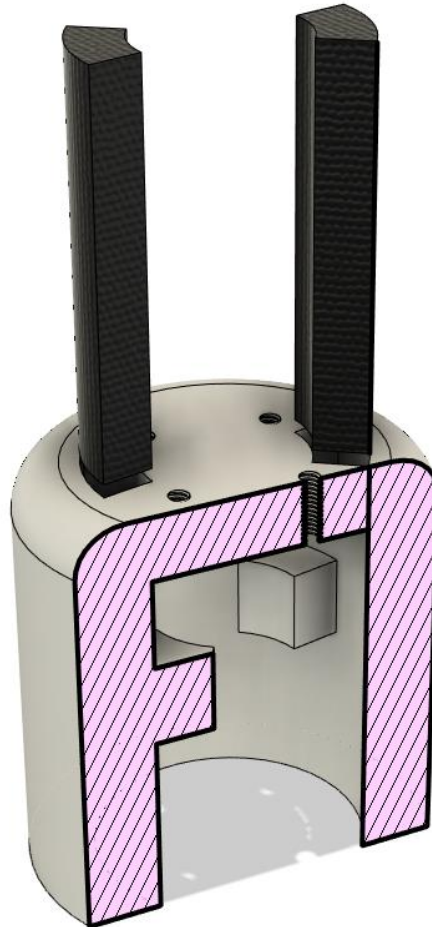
Cutaway View of the Ball Valve Adaptor and Pins
